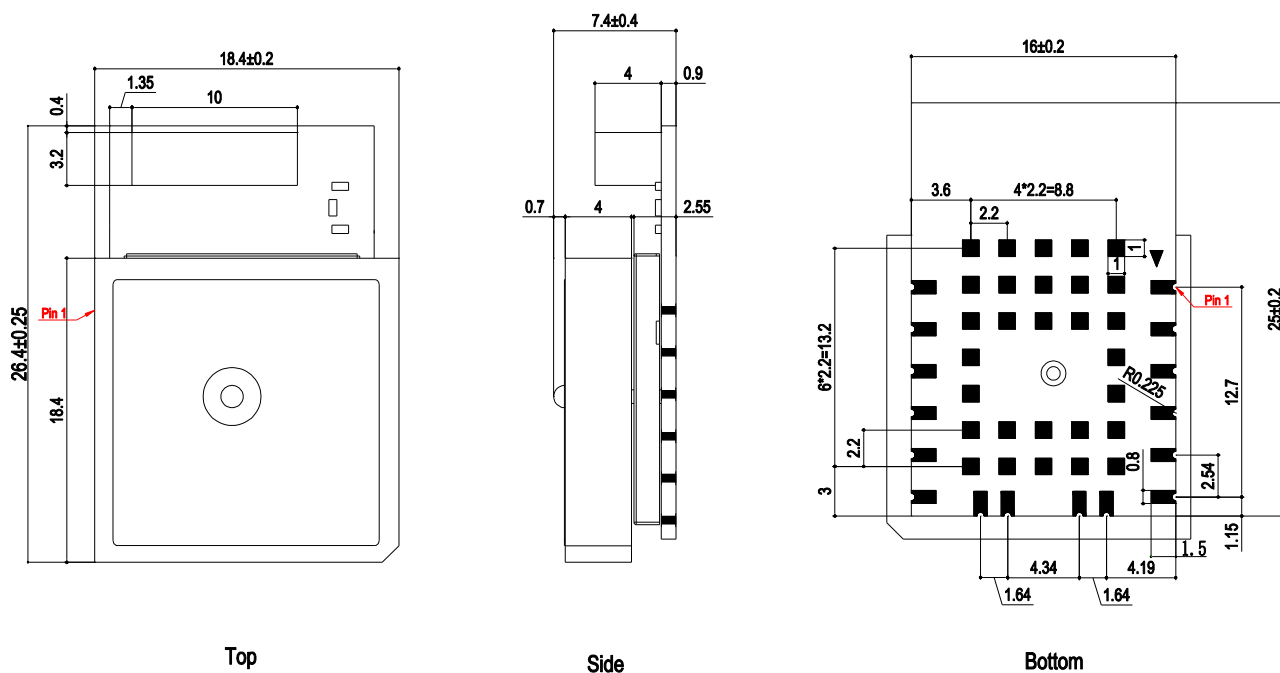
L89 (HA) Top, Side and Bottom View Dimensions
